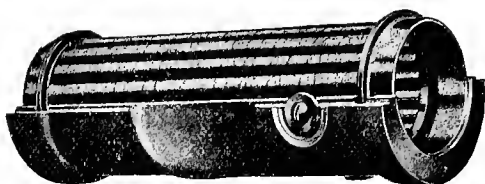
ROLLER BEARING WITH TOP CAP REMOVED.
